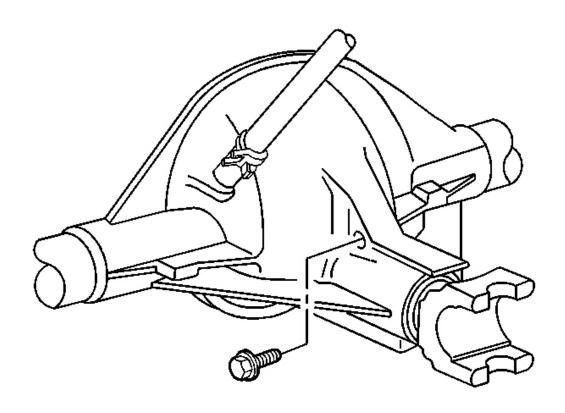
Removing Rear Axle Fill Plug (9.5, 10.5 Inch Axle) Courtesy of GENERAL MOTORS CORP.
